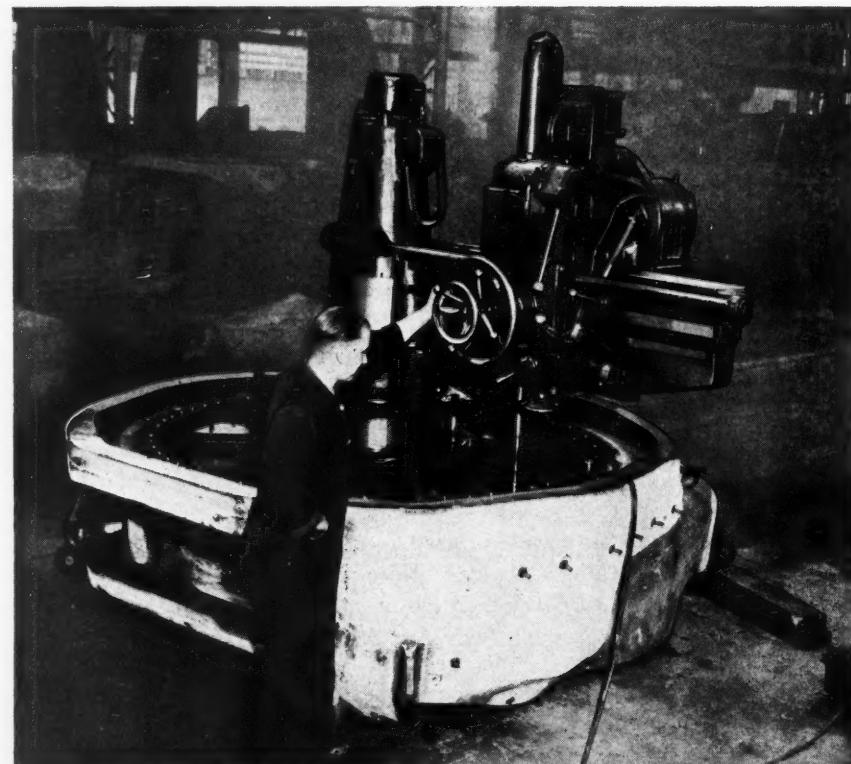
Portable radial drilling machine consisting of an arm, column, and circular base, which is mounted on the tank turret for drilling the bearing-ring attachment holes
